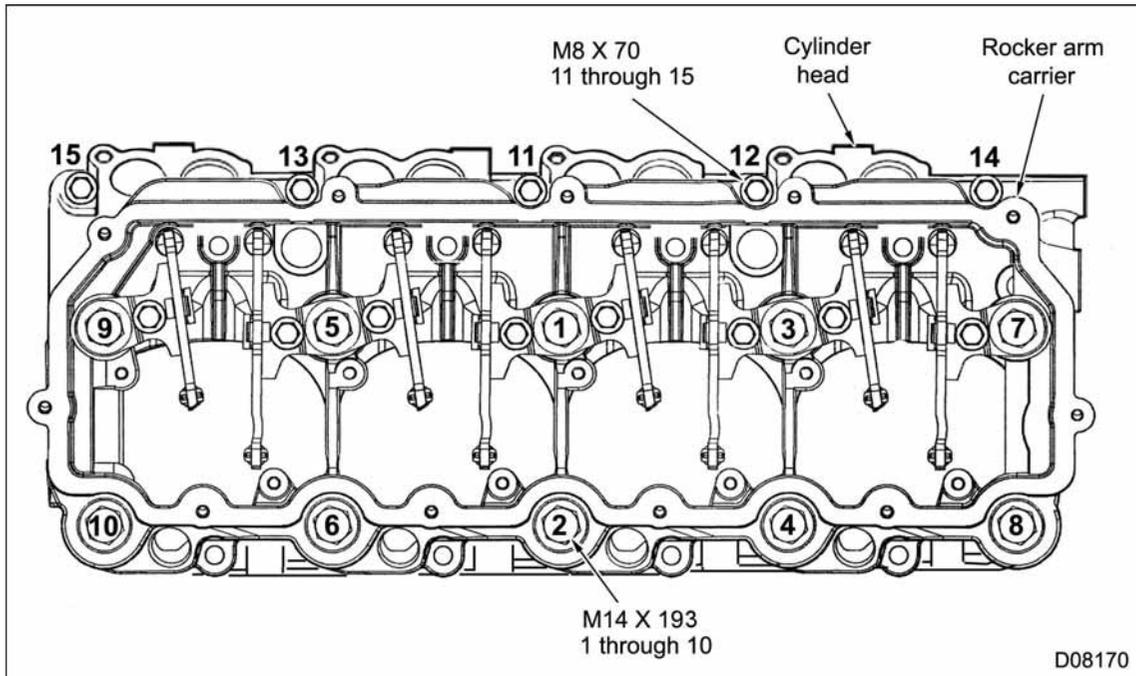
Special torque sequence for cylinder head mounting bolts (typical)
